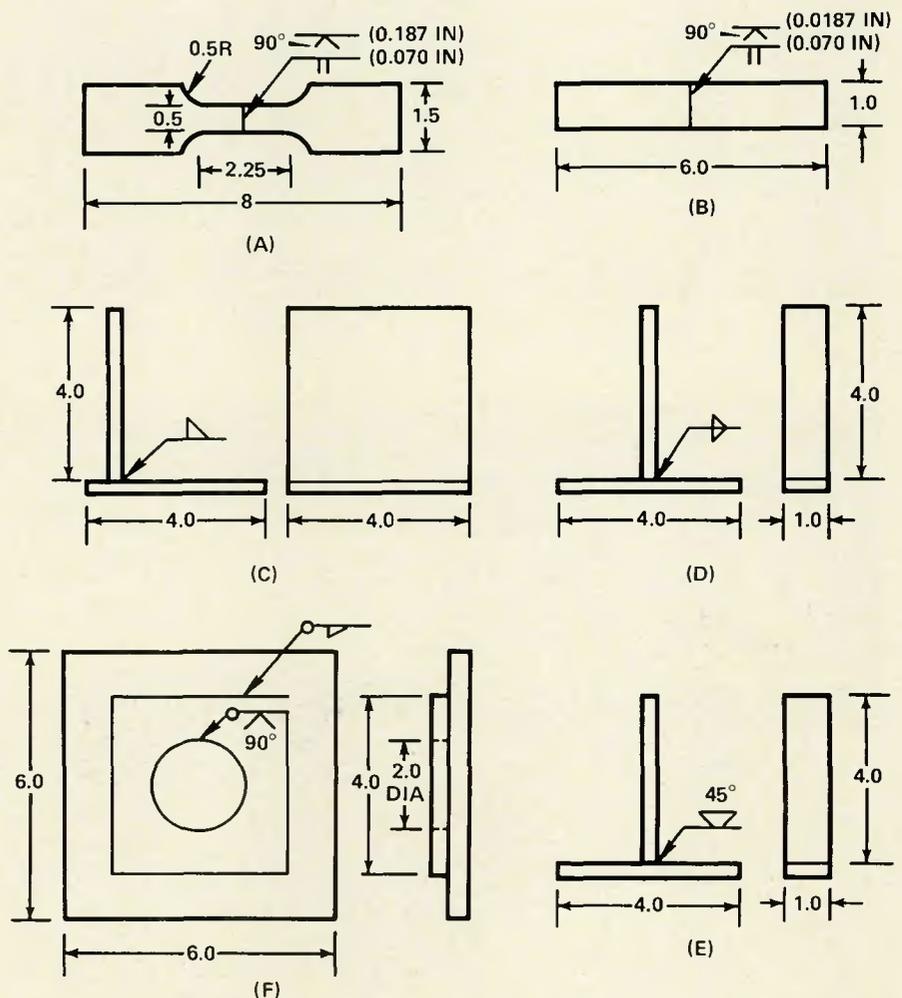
Specimen geometry: (a) butt weld tensile, (b) butt weld bend, (c) single fillet weld bend, (d) double fillet weld tensile, (e) plug weld tensile, (f) restrained weld patch
